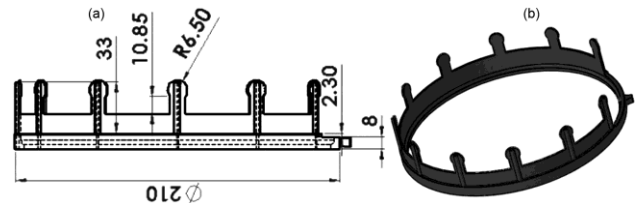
CAD of Orifice cover – fertilizer chamber (a) side view, and (b) isometric view of fertilizer orifice cover.
